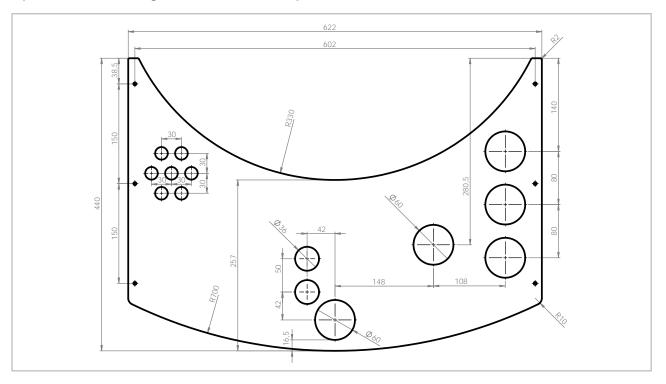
Pipe connection arrangement WKF NEO-compact 80/100/130/170 - 300 I - version (all dimensions in mm)
